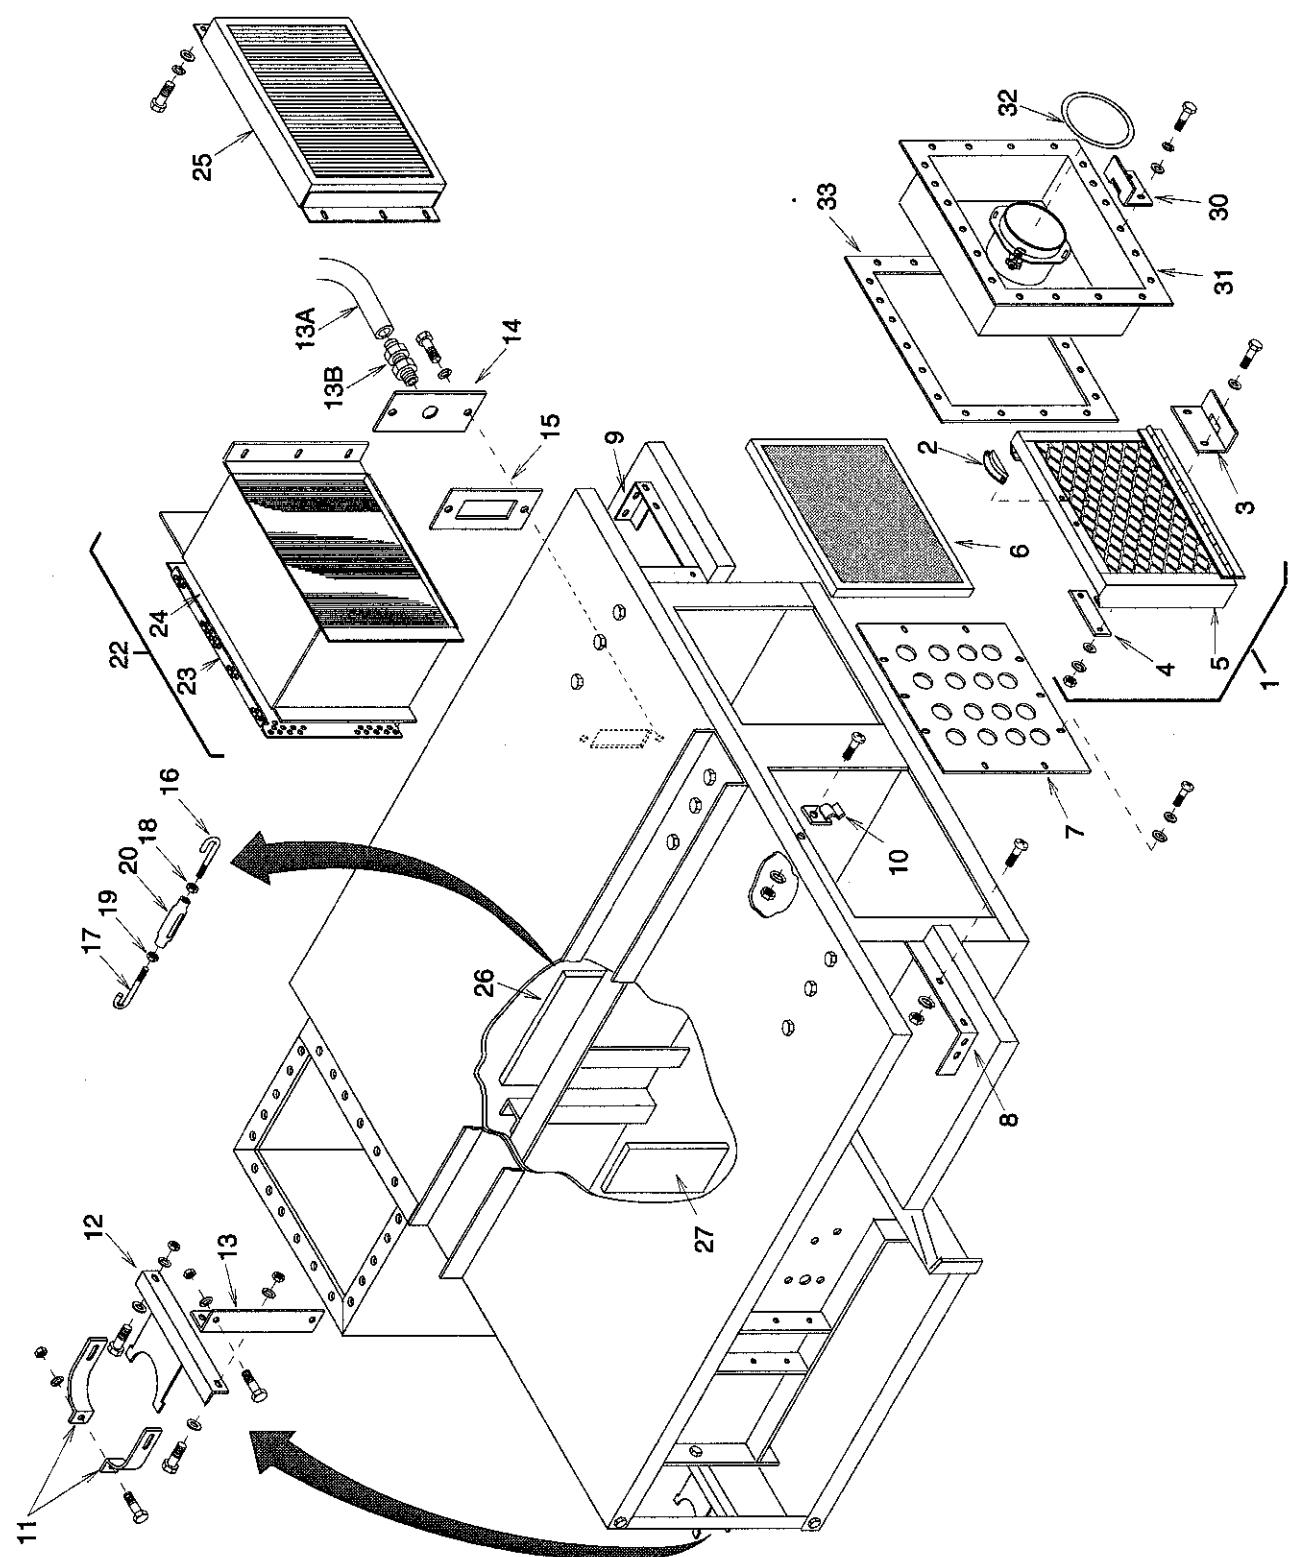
Air Duct Assembly (Sheet 1 of 2)
